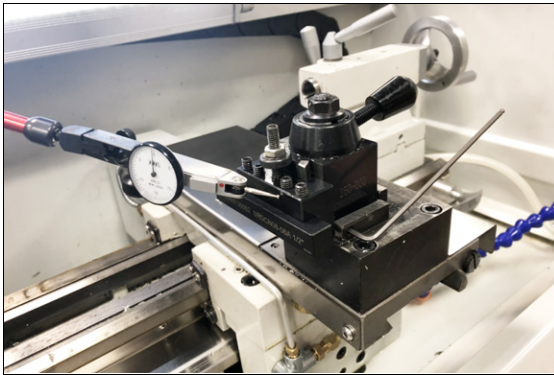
Magnetic dial test indicator on the face of the tool holder.
